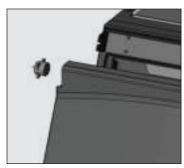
With the door bracket end cap removed, the damper sits freely in the door.
